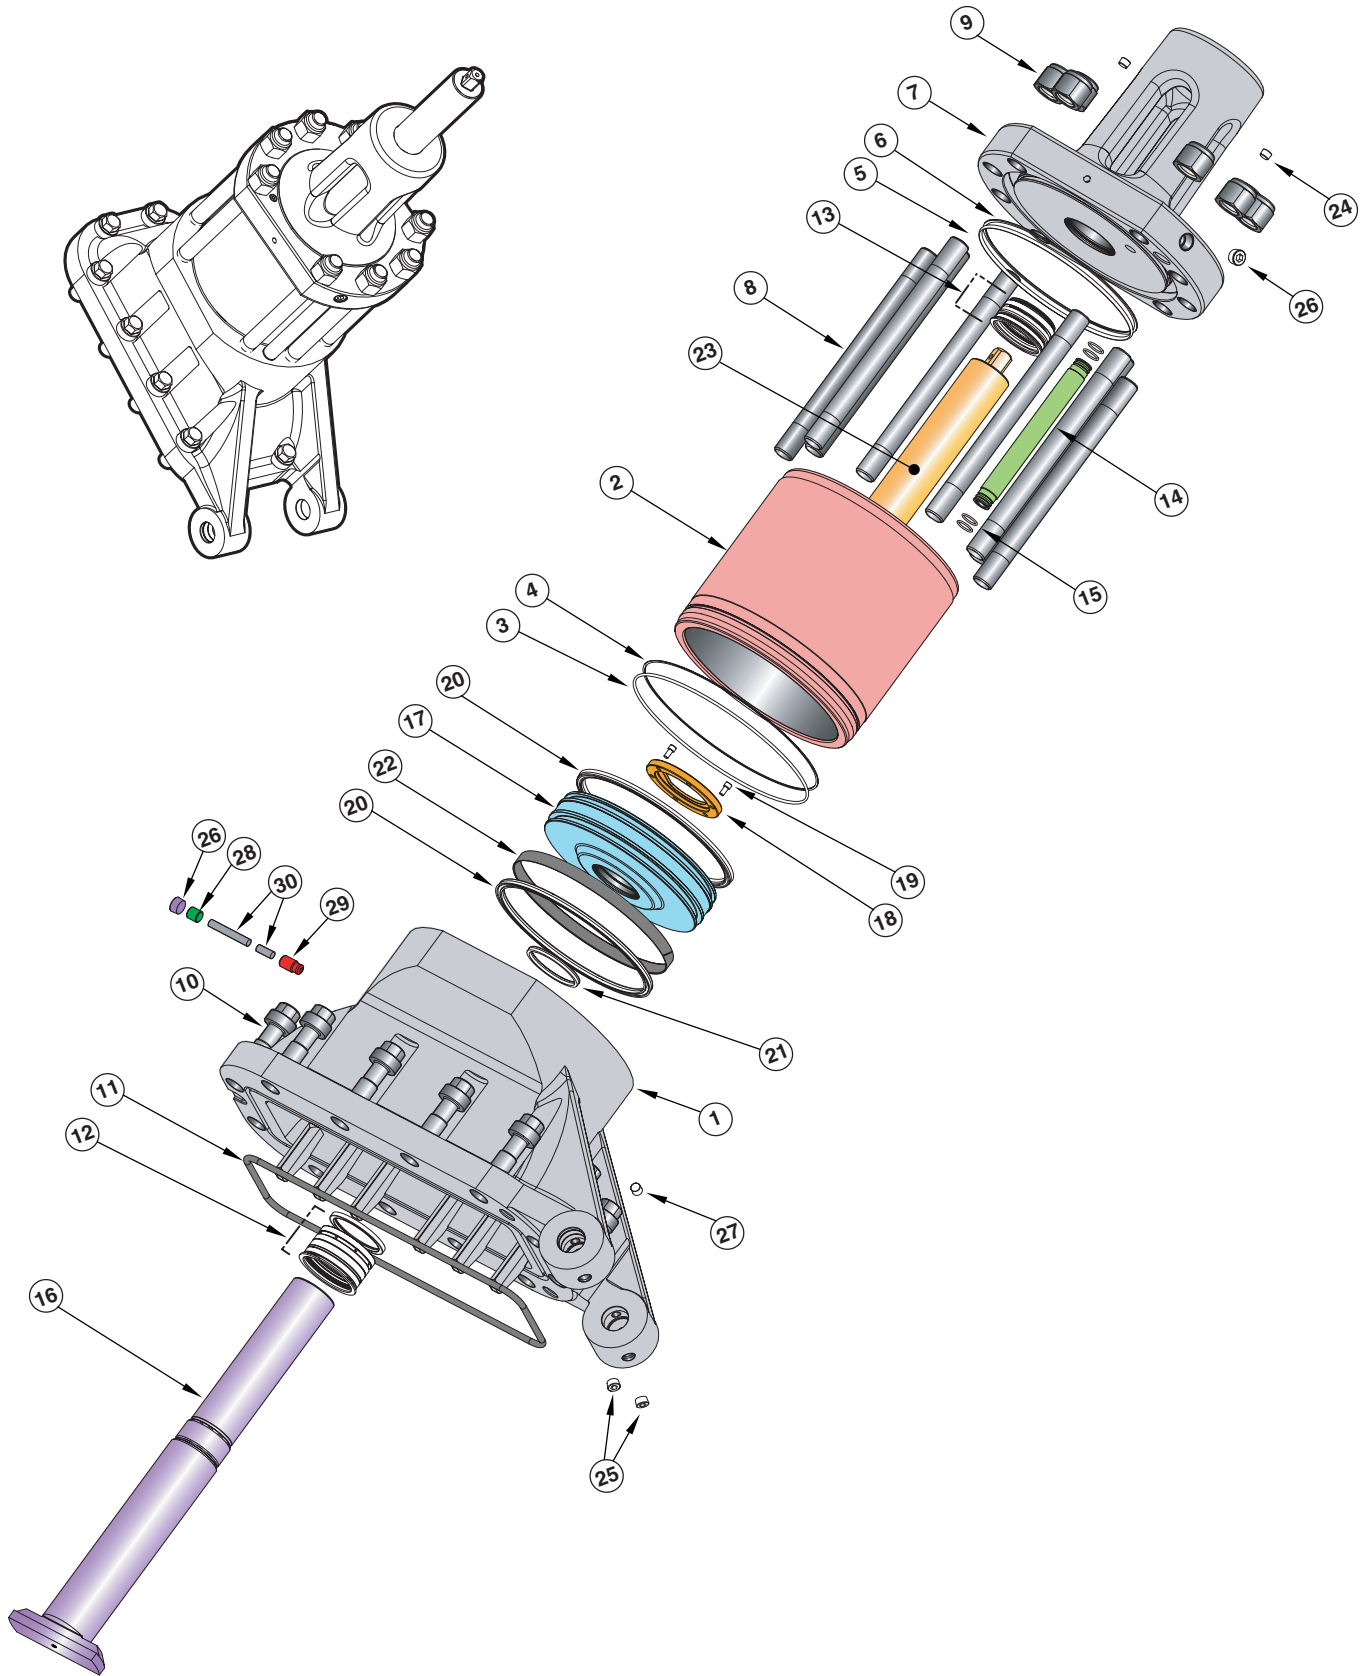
LWS 15 1/4" Cylinder Assembly
